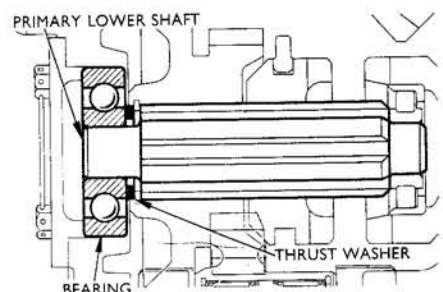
When installing latest primary gearbox lower shaft and front bearing, a thrust washer is placed between bearing inner race and gear locating snap ring.
